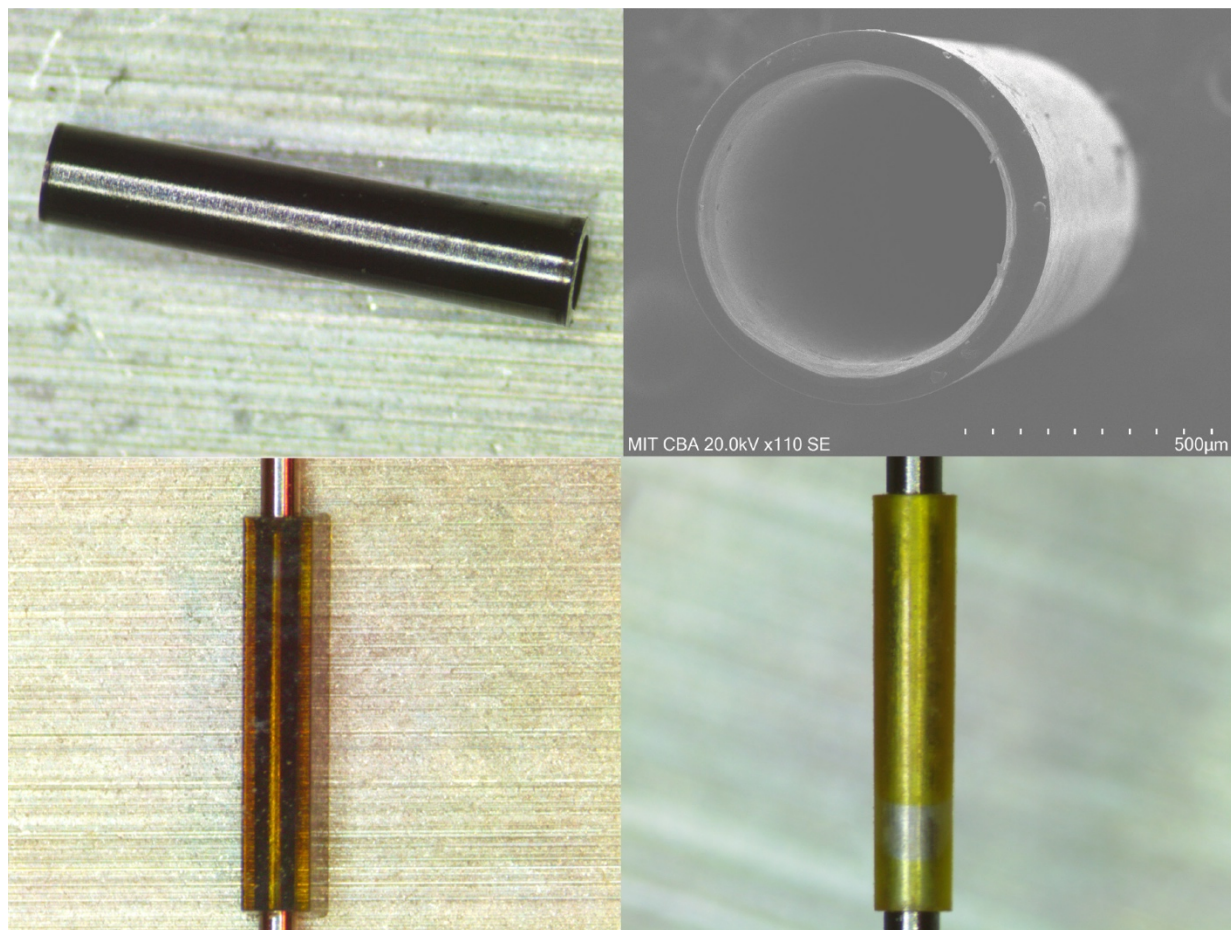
Collage of current diamond rotor machining progress. (Top left) Fully machined diamond rotor prior to being baked in a furnace. (Top right) SEM image of diamond rotor. (Bottom left) Diamond log with machined through hole. A 0.49 mm gauge pin has been placed through the hole. (Bottom right) Fully machined diamond rotor after being baked in a furnace. A 0.49 mm gauge pin has been placed through the rotor.
